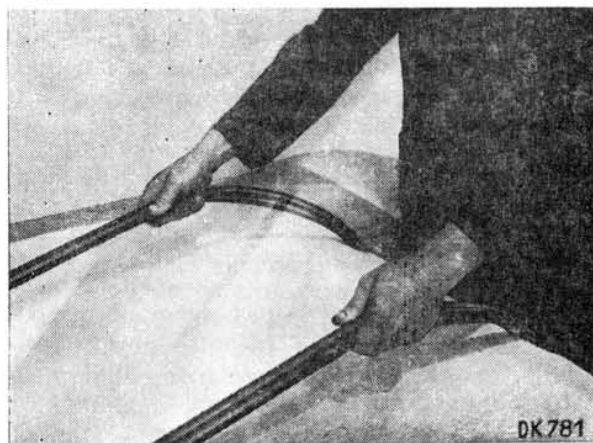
/1 - Fitting Glazing Rubber Moulding on a Glass Pane
